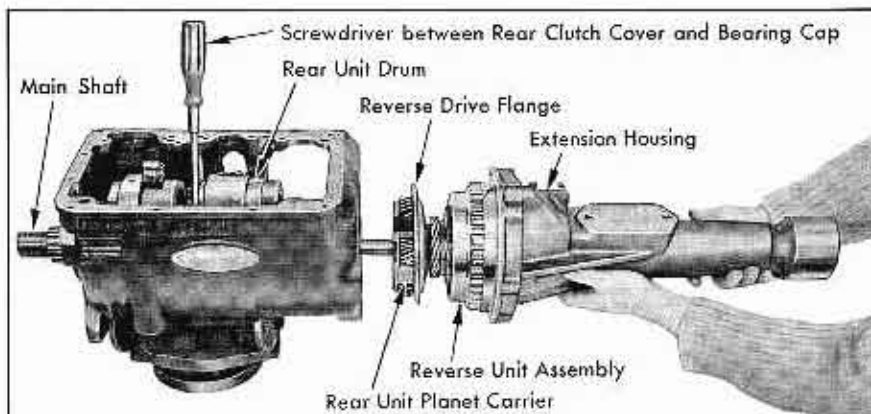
Removing Extension Housing and Reverse Unit Assembly
